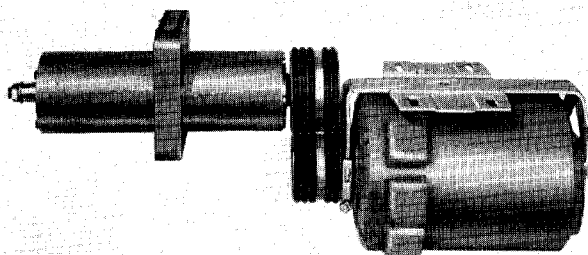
Antifriction-Bearing Spindle with Oriflex Drive.
